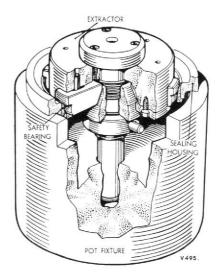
Pressing safety bearing out of sealing housing with extractor T.78038 and pot fixture T.78039.
